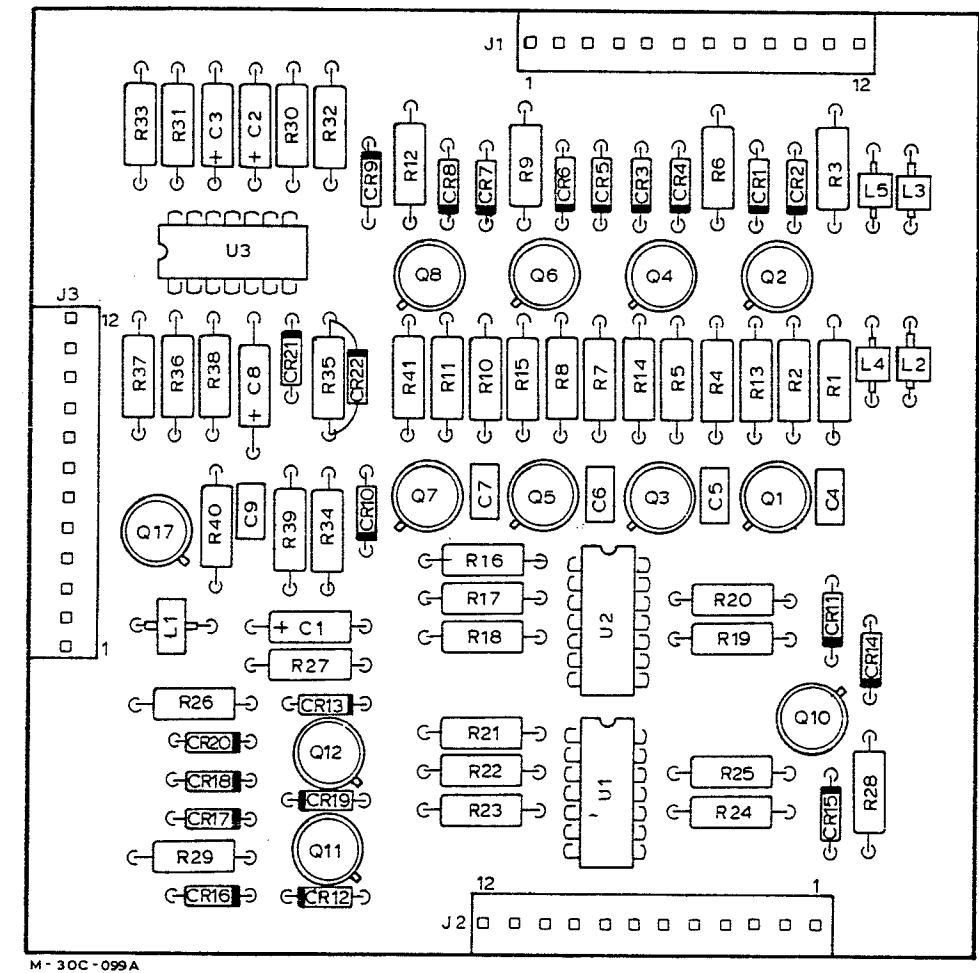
Assembly Detail - NAPC11 Interface Pcb
